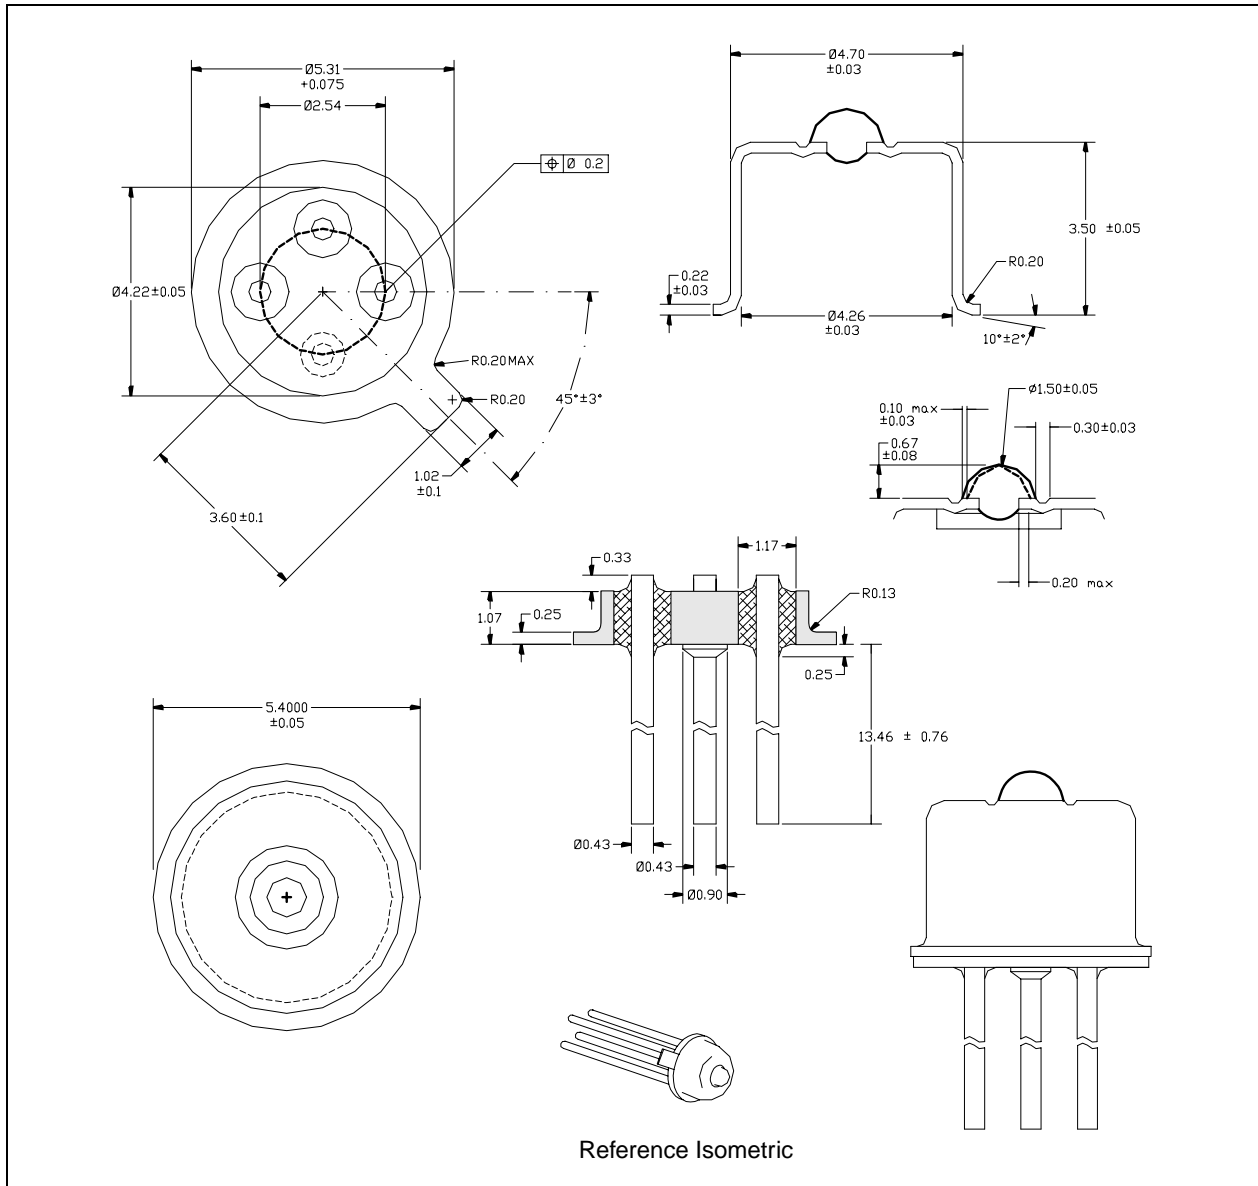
Package Drawing for TO-46 Ball Lens, 3mm Lead Length (WD)
